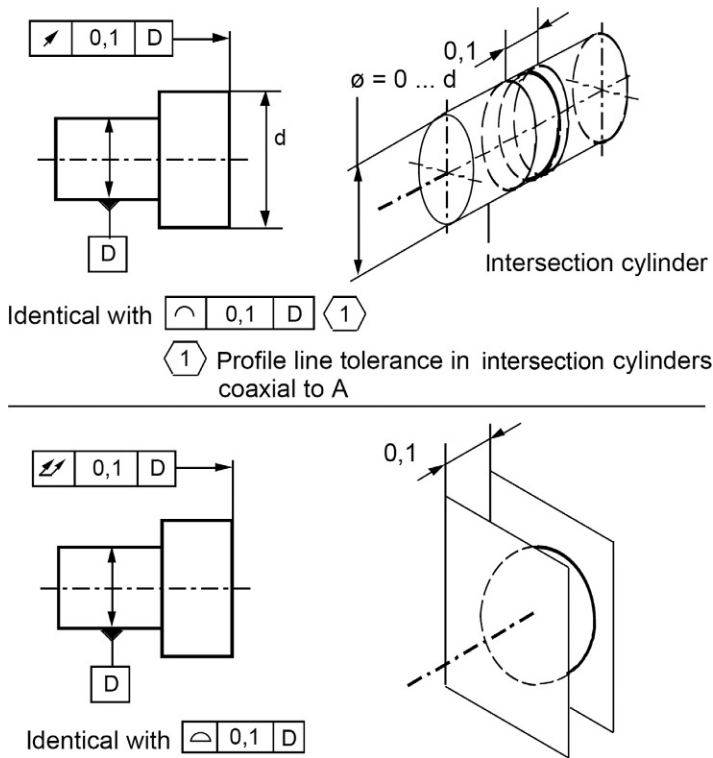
Circular axial run-out tolerance, total axial run-out tolerance: drawing indications, tolerance zones
